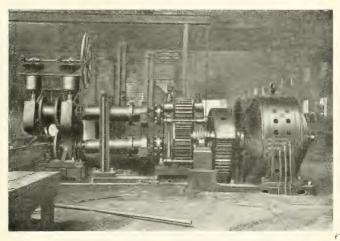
HP, 450 R.P.M. MOTOR DRIVING WELDING ROLLS
